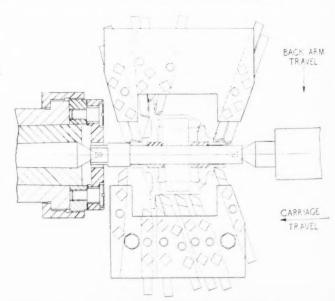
An alternate method of mounting a single piece differential case on Fay automatic lathe
